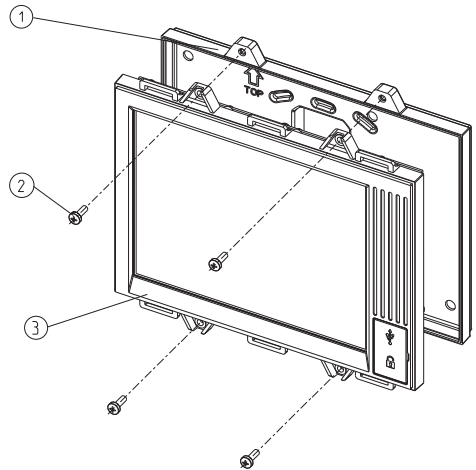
Installation Overview of Zonal Display Mounting with Shallow Back Cover
